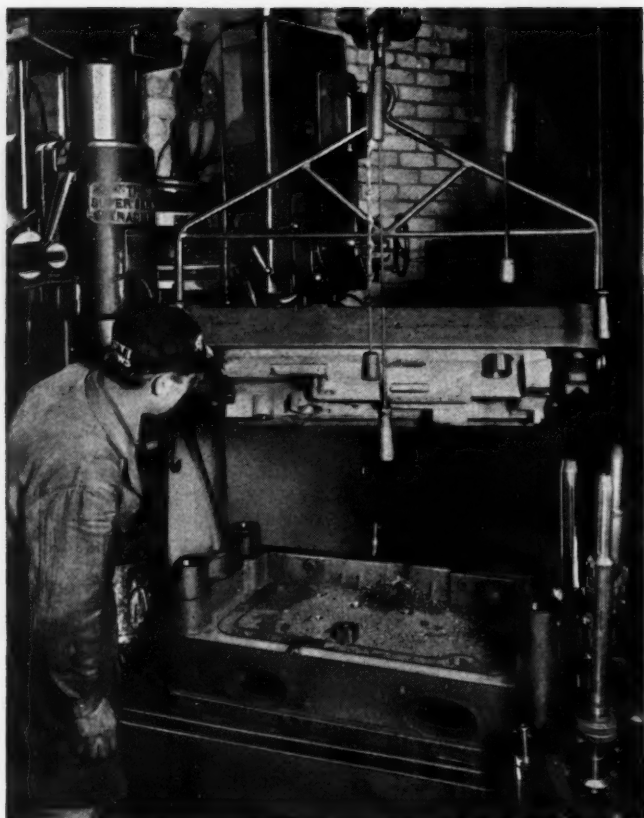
Tooling Designed for Performing Precision Boring Operations on a Radial Drilling Machine
